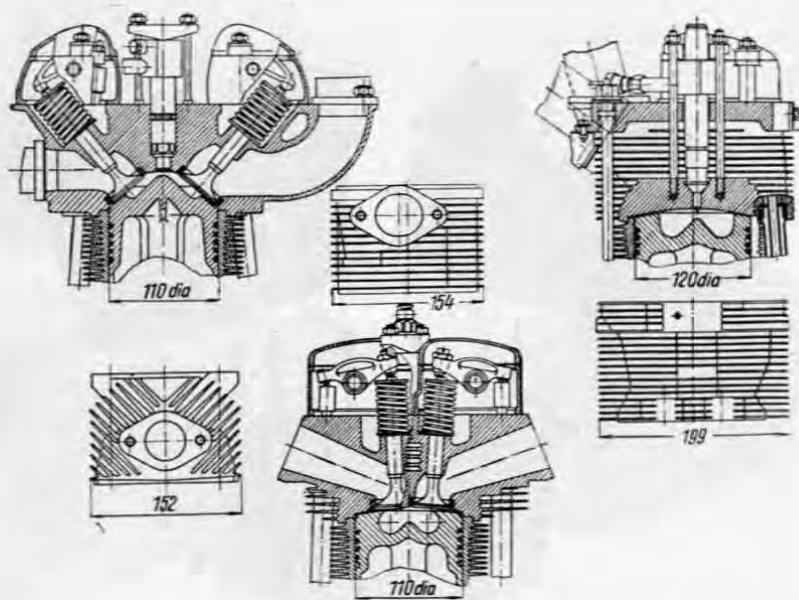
Development of the cylinder head of the Tatra compression-ignition engine.
